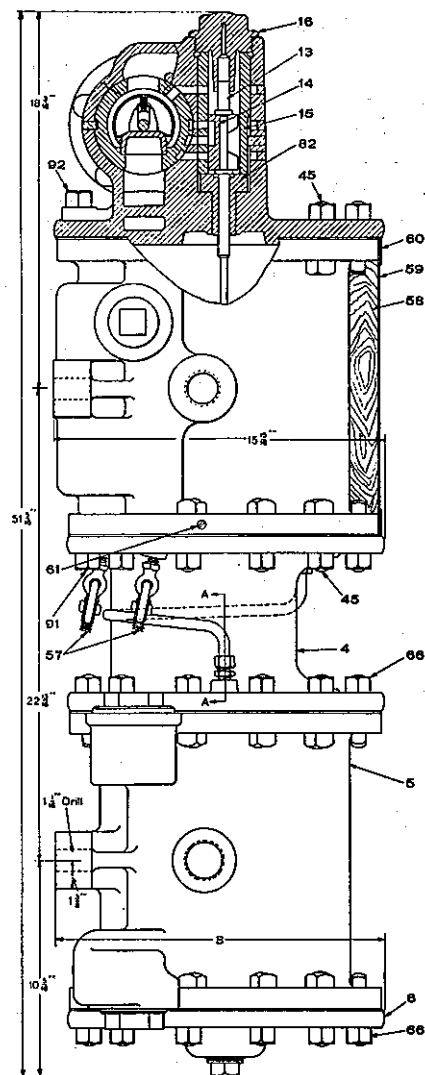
11" Air Compressor outline view with section through the Reversing Valve
